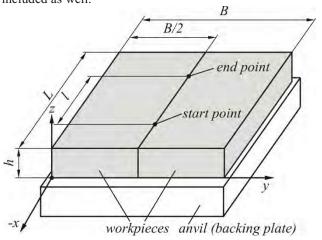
Scheme of the positioned workpieces in position for welding
